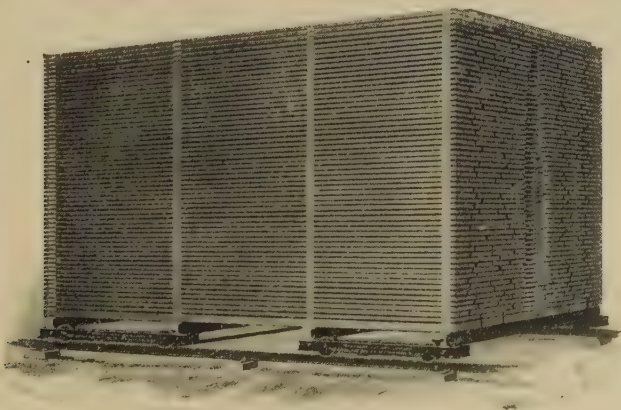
Lumber end piled on kiln trucks. (*Courtesy, Standard Dry Kiln Co.*)
